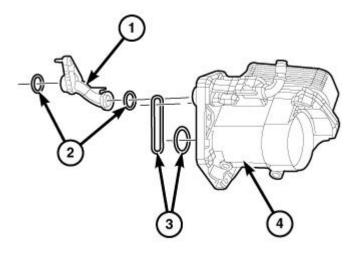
Oil Filter Tube & Housing With O-Ring Gaskets Courtesy of CHRYSLER LLC
